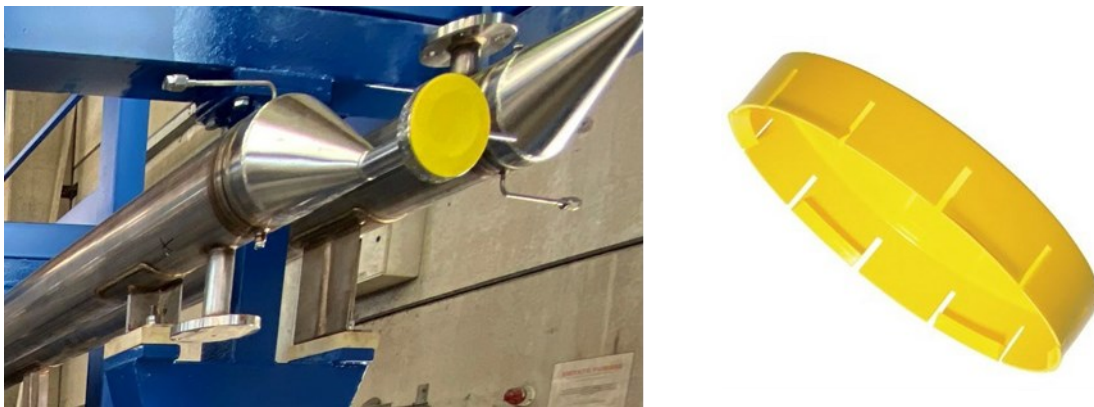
Plastic cap to be used for protecting the opened flange after the removal of the blind flange
